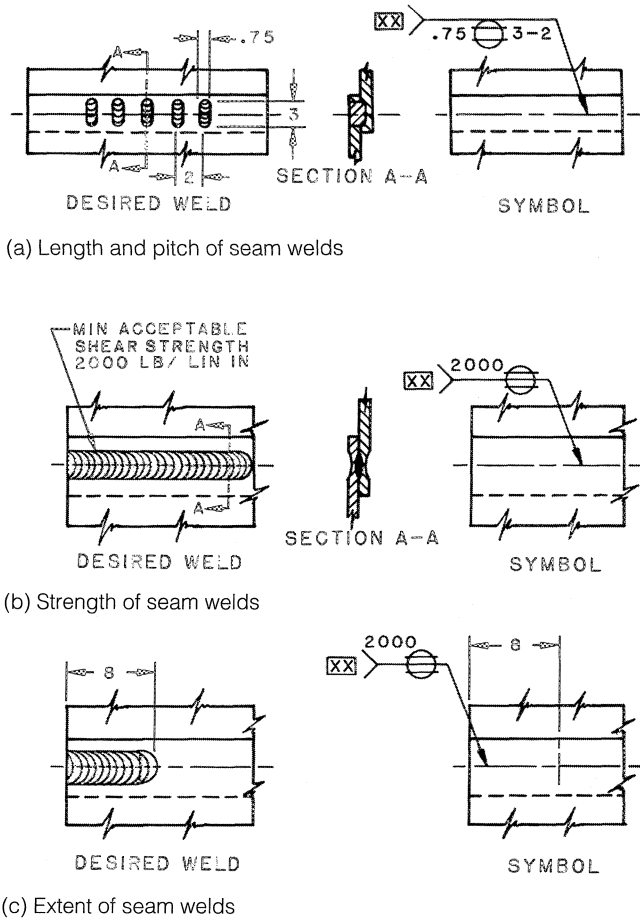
Application of Dimensions to Seam Welding Symbols
